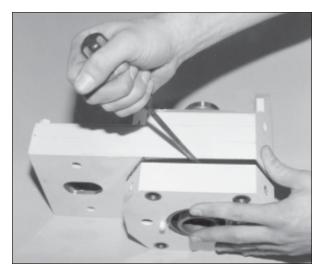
If necessary, pry top plate away from gear drive box with screwdriver.
